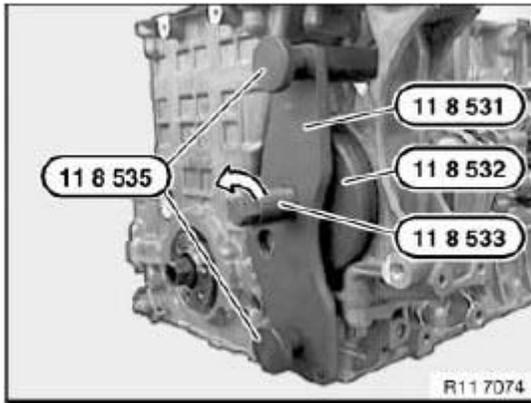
Twisting Out Special Tool (11 8 533) And (11 8 532)
